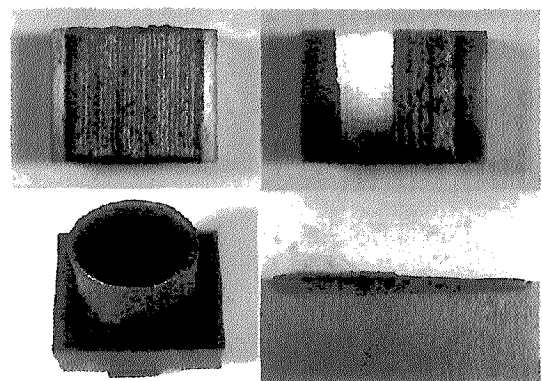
Laser cladding and rapid prototyping of 316L stainless steel on mild steel.
